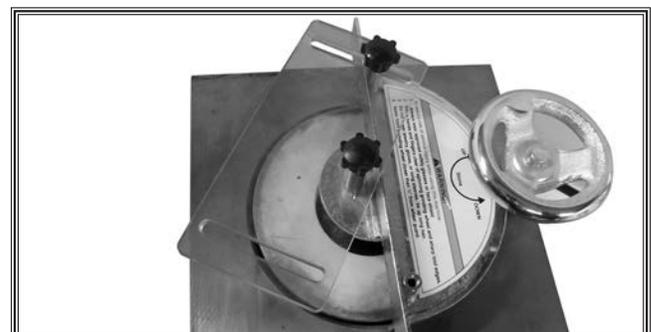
Adjustable guard alternate setup (knife clamp removed for illustration purposes).
